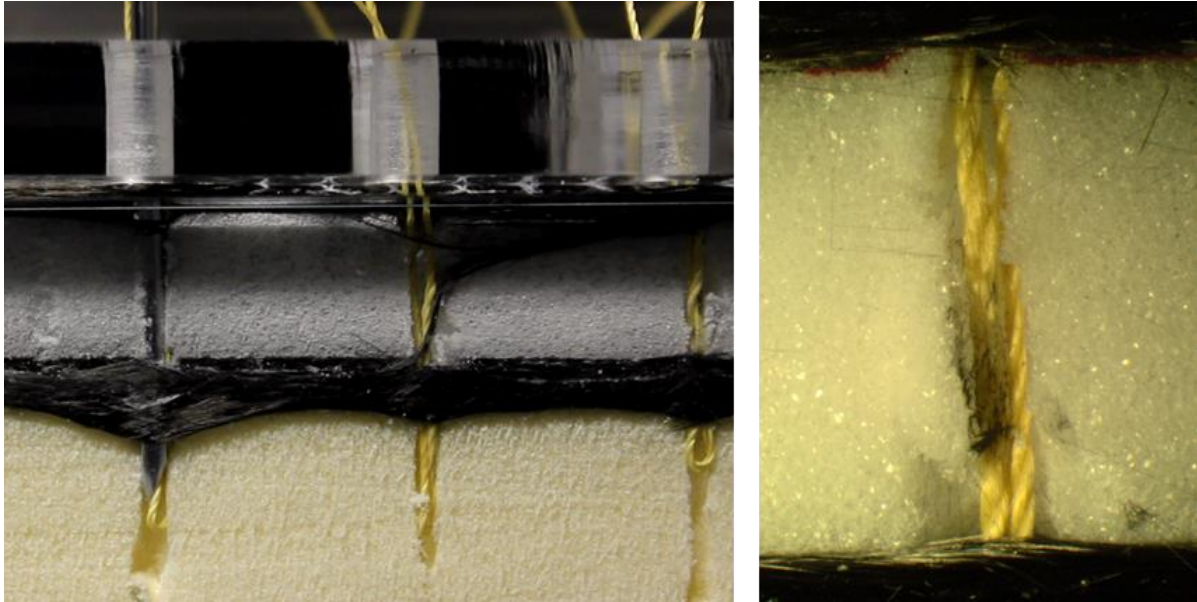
Tufting process with thread (L); thread in needle channel (R)
